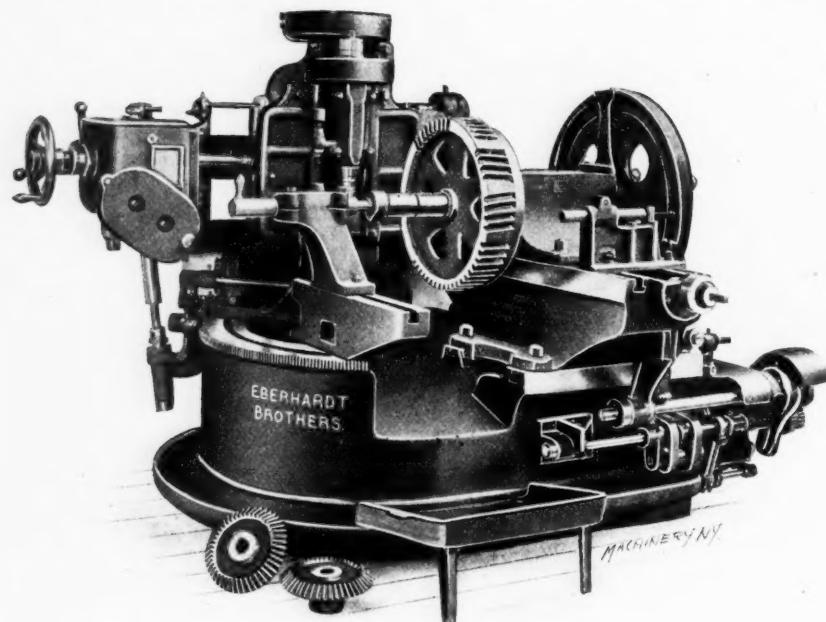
An Automatic Machine for Cutting Spur and Bevel Gears; also adapted for Worm, Skew, and Face Gears.
